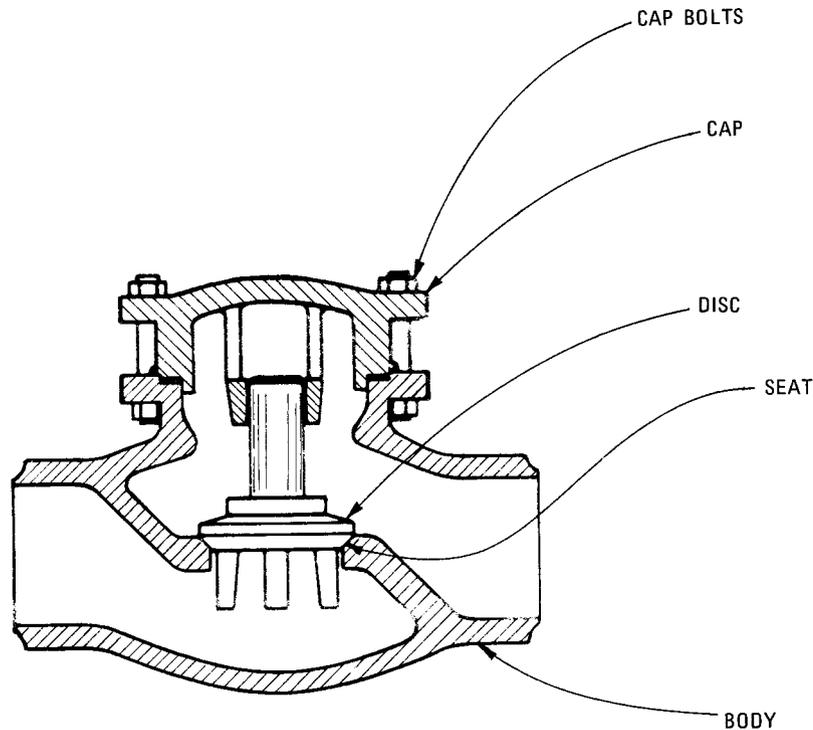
Lift Check Valve With Lower Disc Guide.
